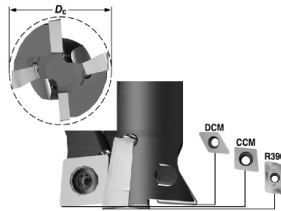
Coroplex MT the Multi-Profession Tool with Different Types of Tool Tips
